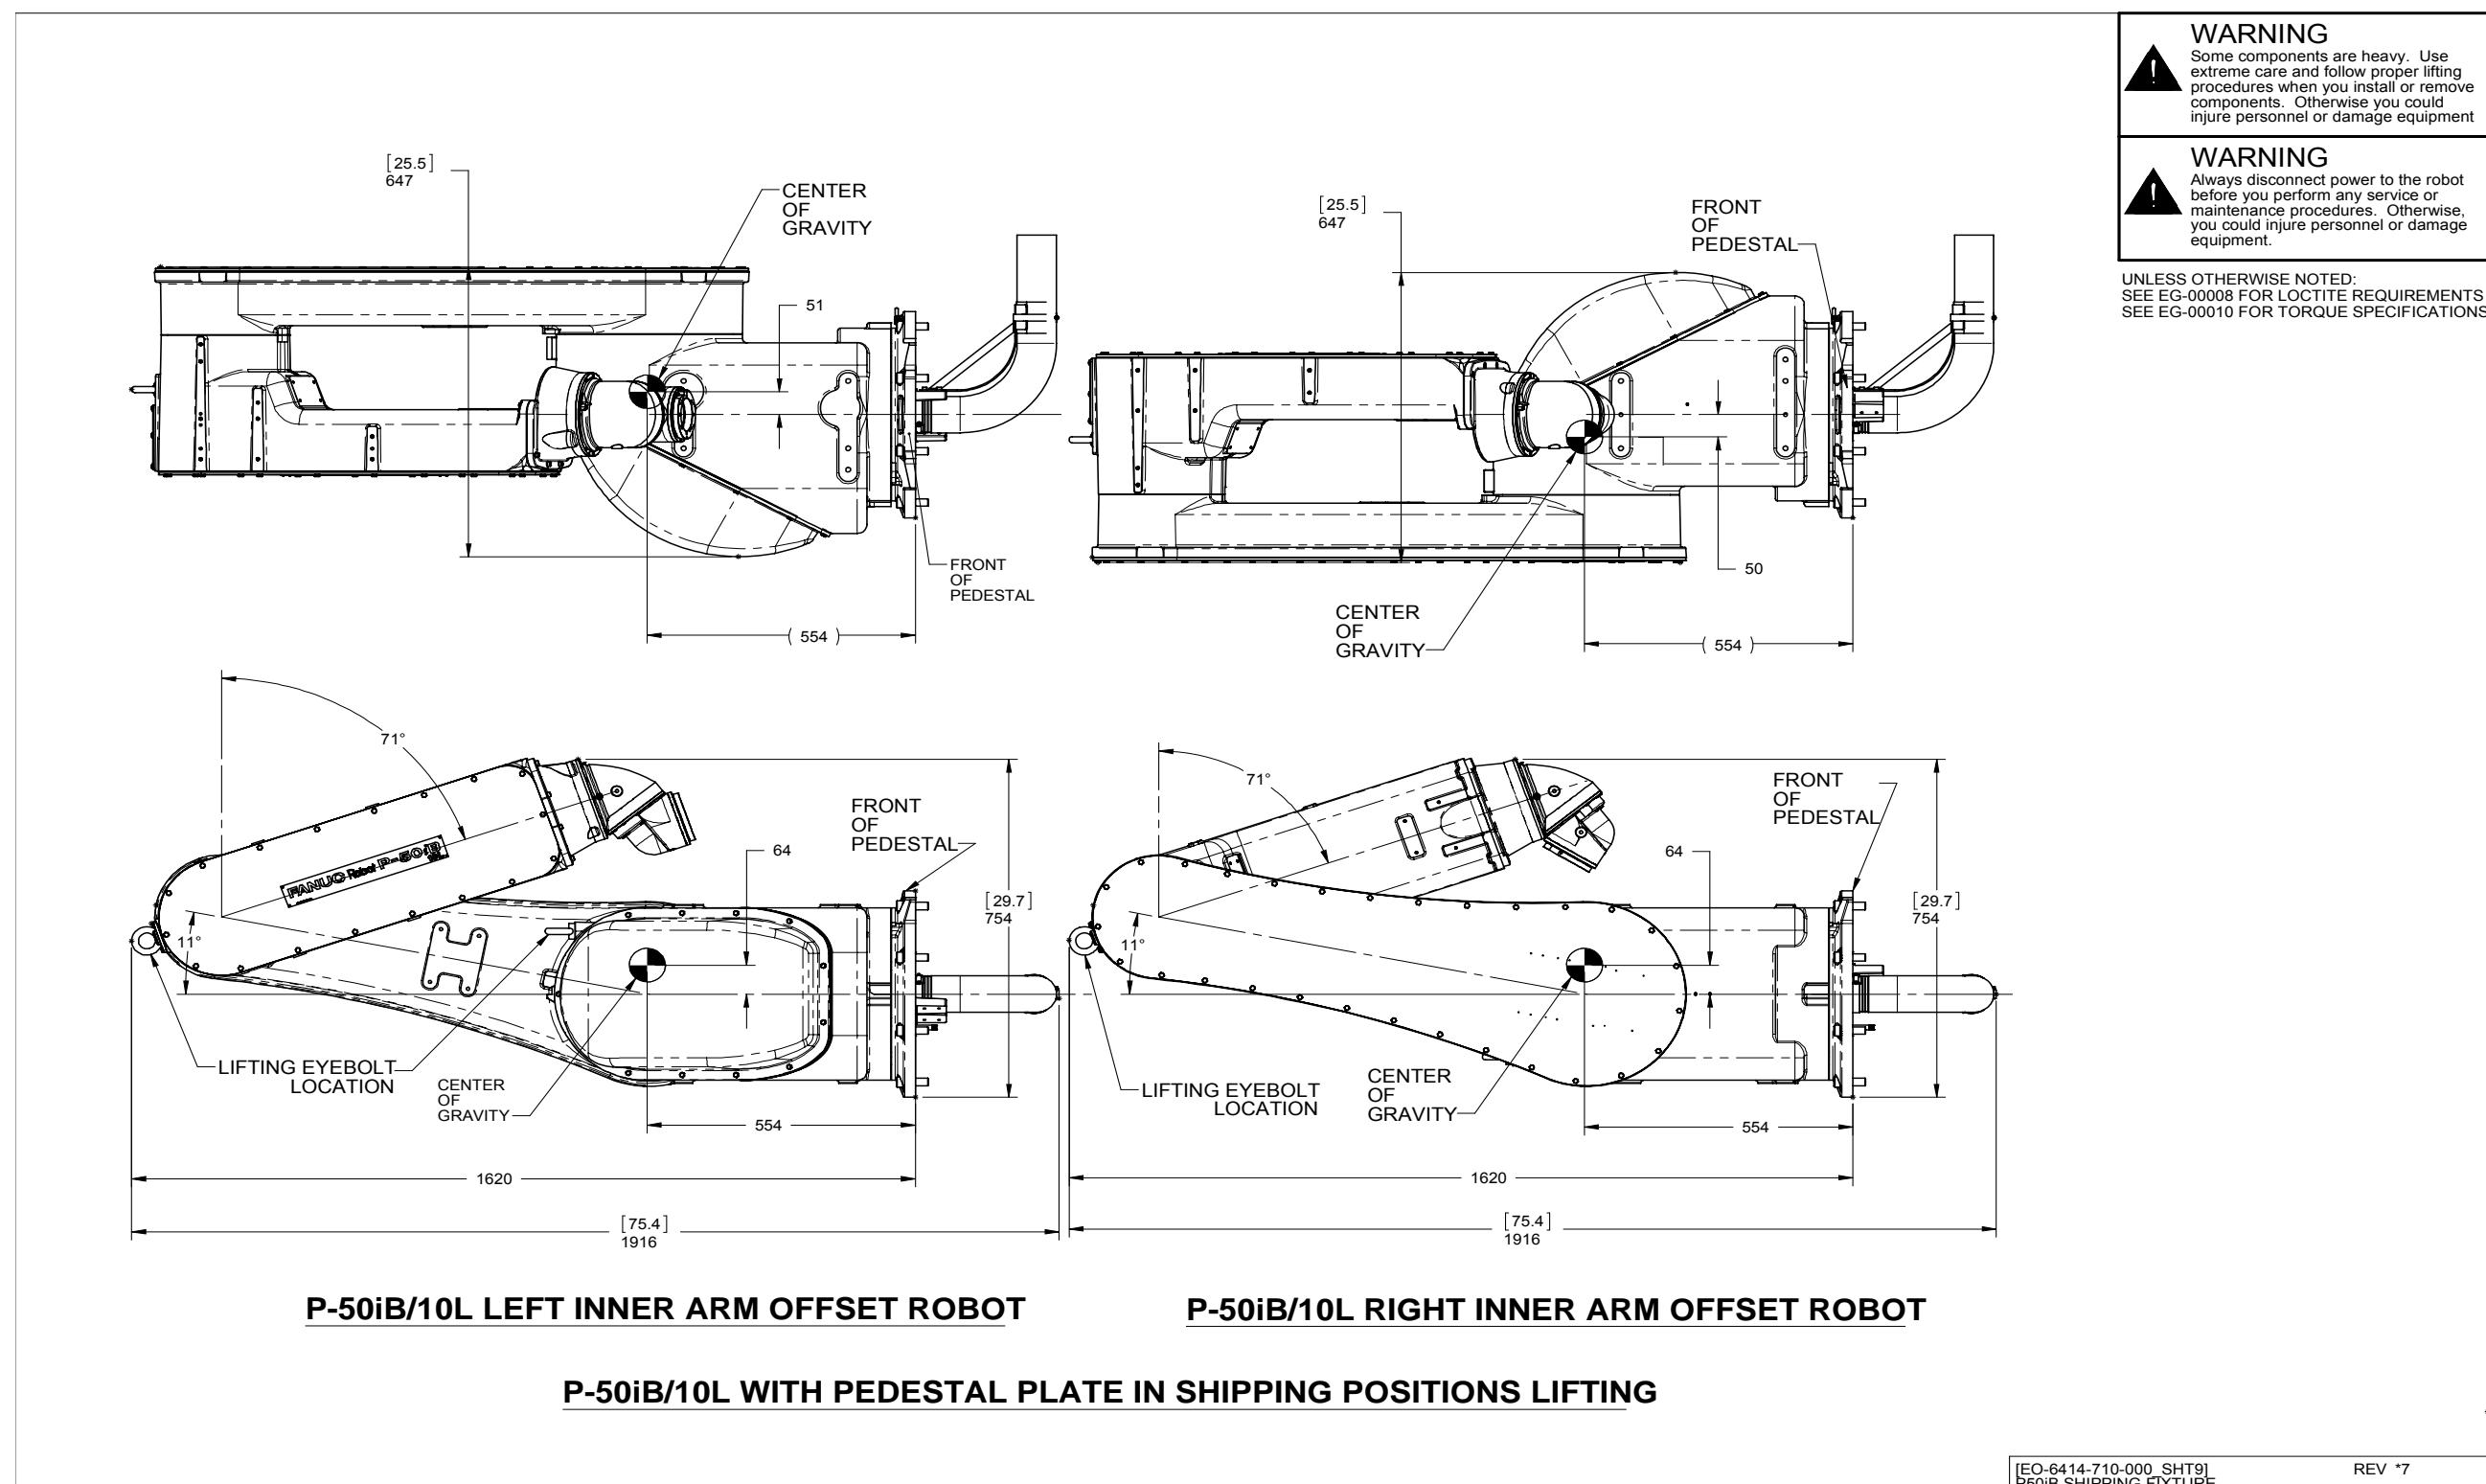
EO-6414-710-000 SHT9, P50iB SHIPPING FIXTURE
